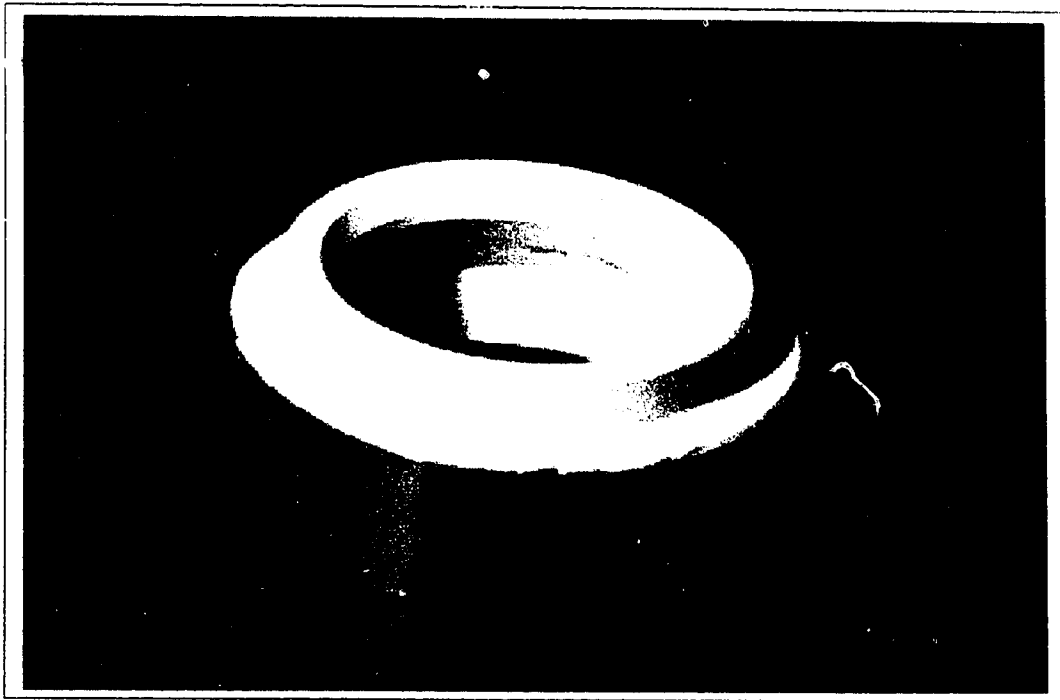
Cracked Valve Shown With Dye Penetrant
